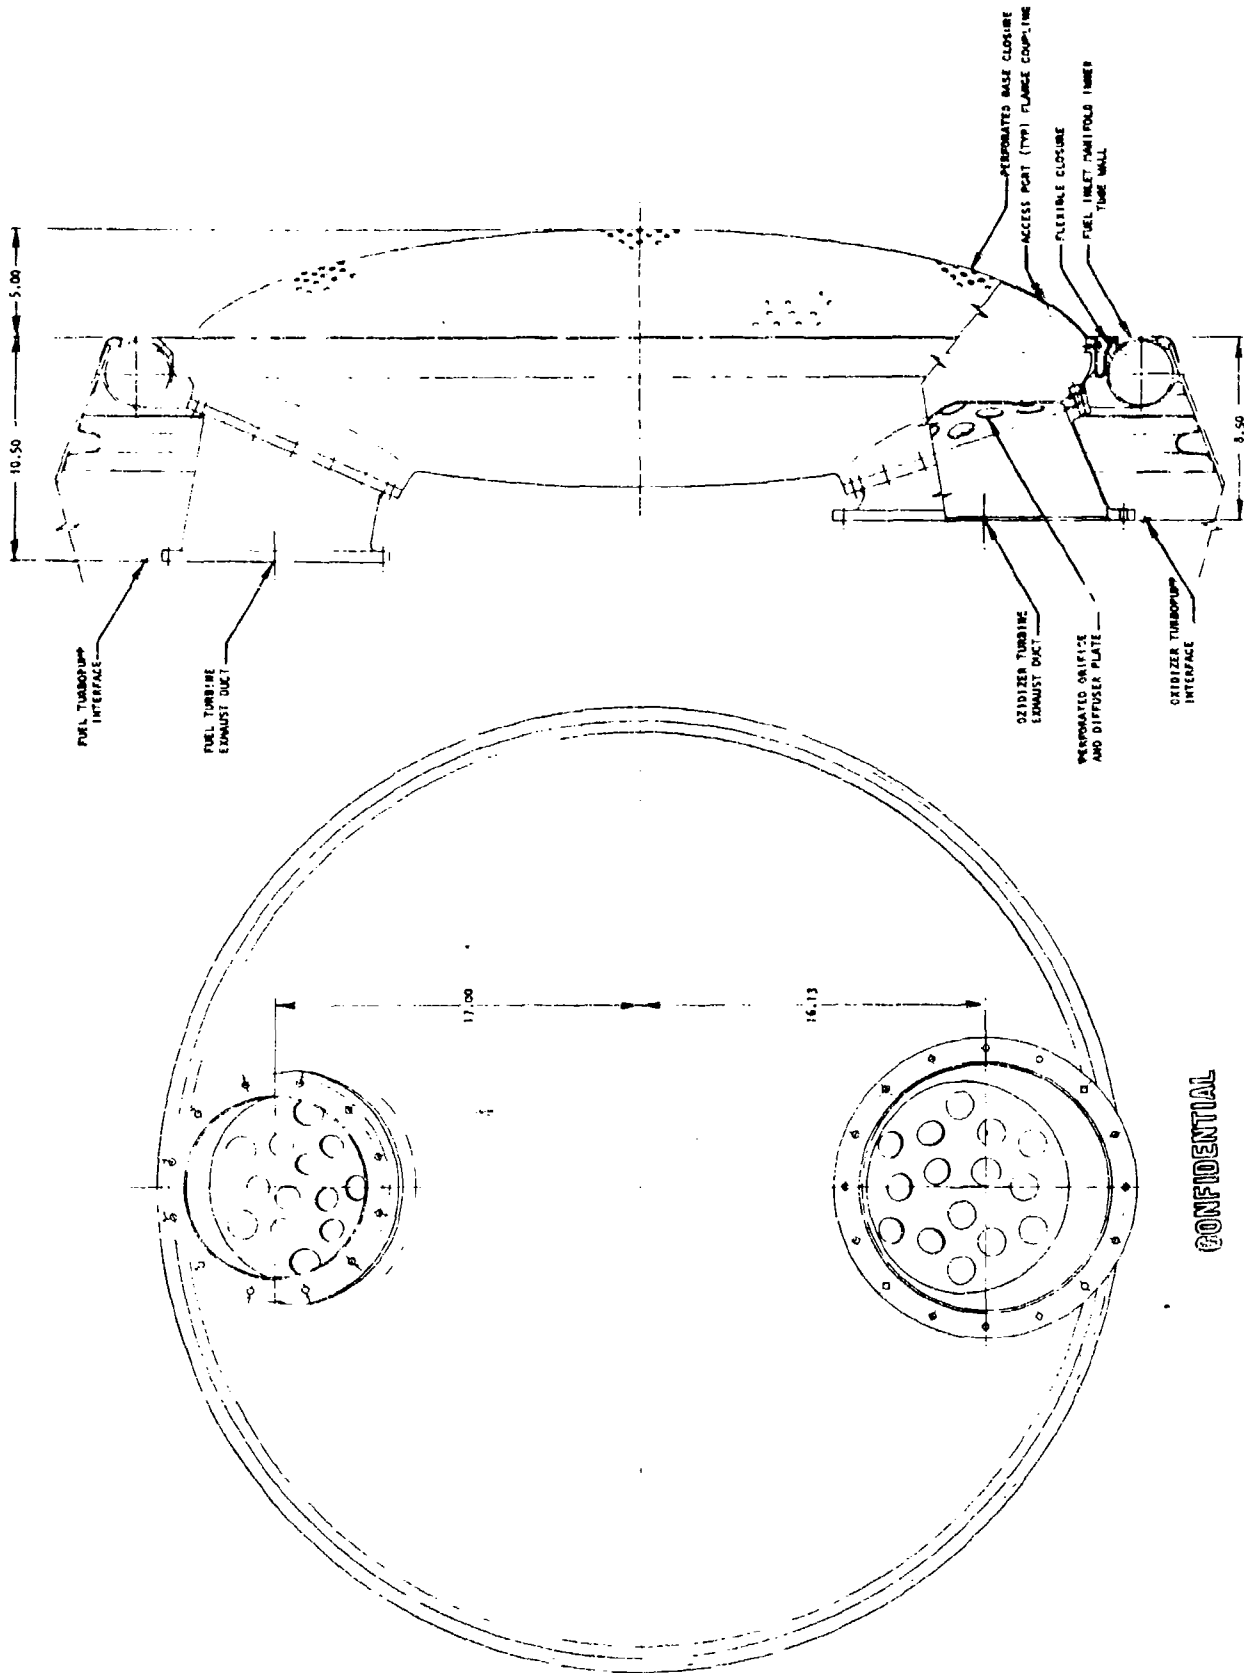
250K Demonstrator Module Porous Base Closure Assembly
